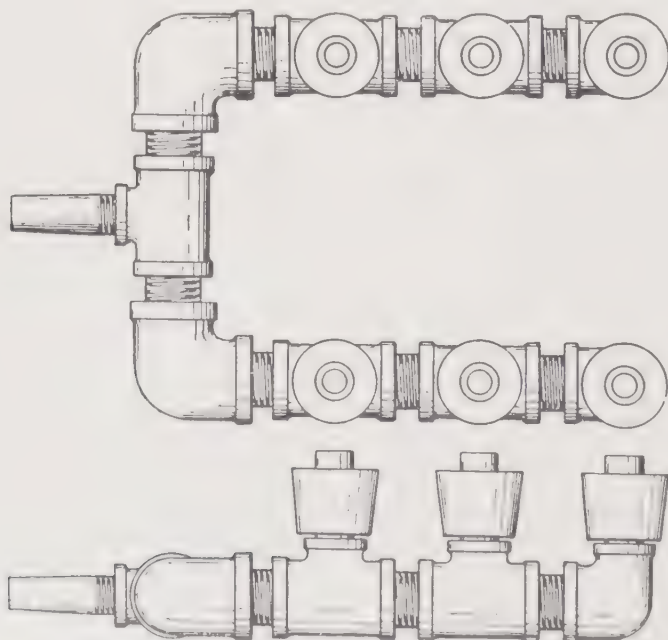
VIEWS OF MANIFOLD ASSEMBLED WITH PIPE FITTINGS
